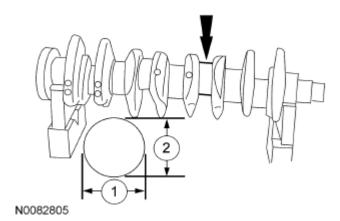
Measuring Crankshaft Connecting Rod Bearing Journal Diameters In At Least Two Directions
